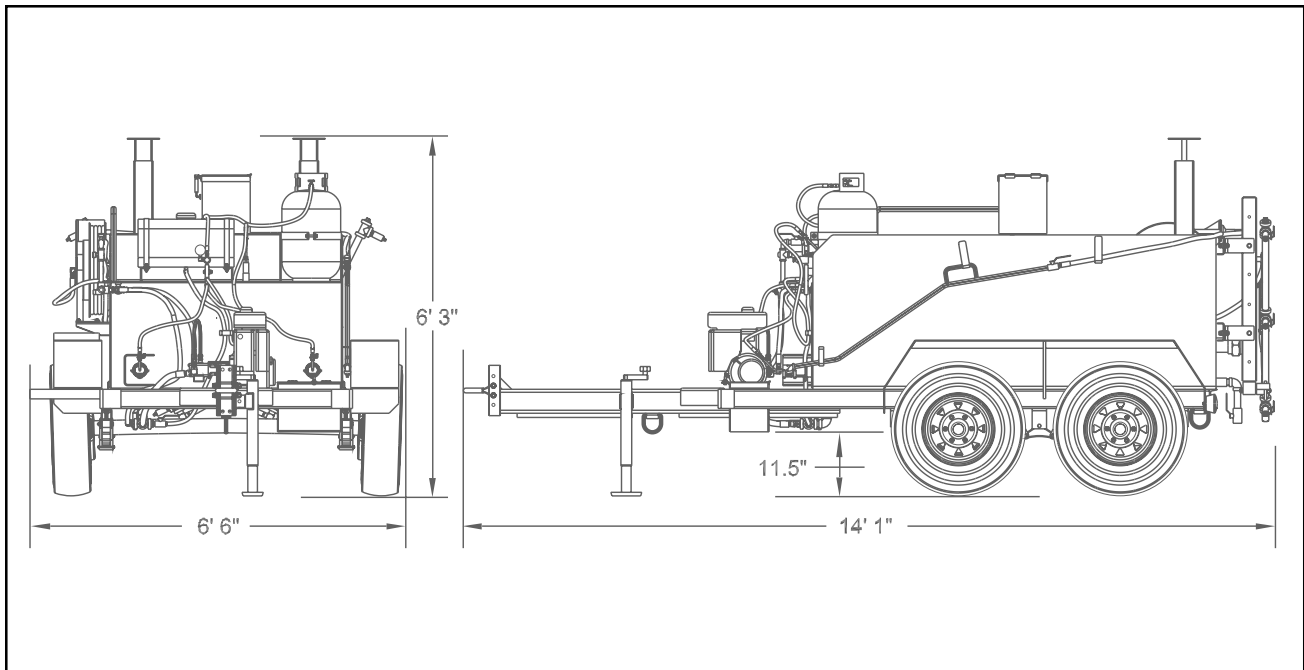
OUTLINE DIMENSIONAL DRAWING - L500T
